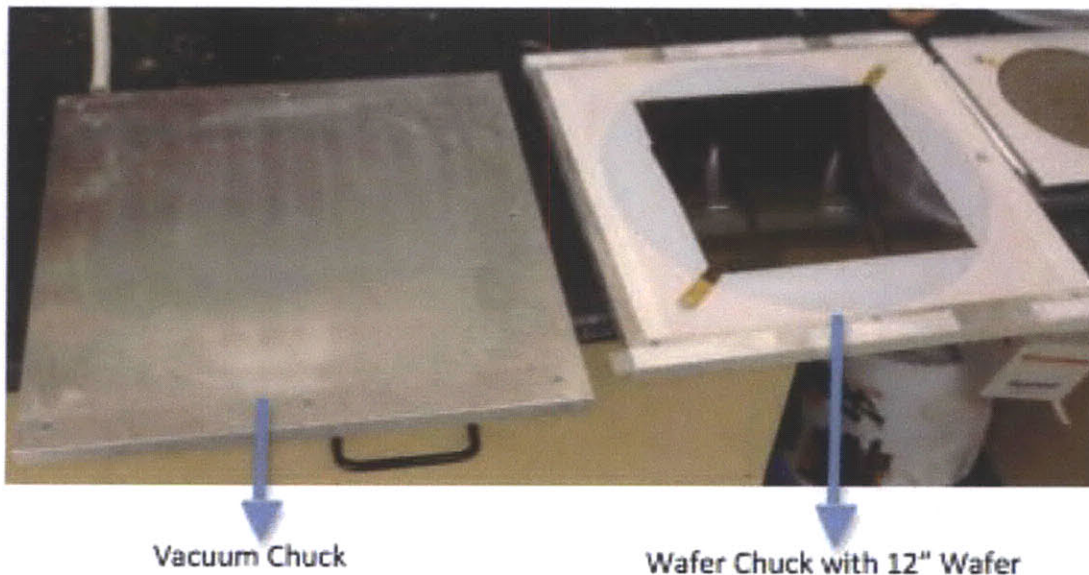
Main Parts of Aluminum Casting Machine for Large Area Stamp, Developed by Nano-Terra LLC.
